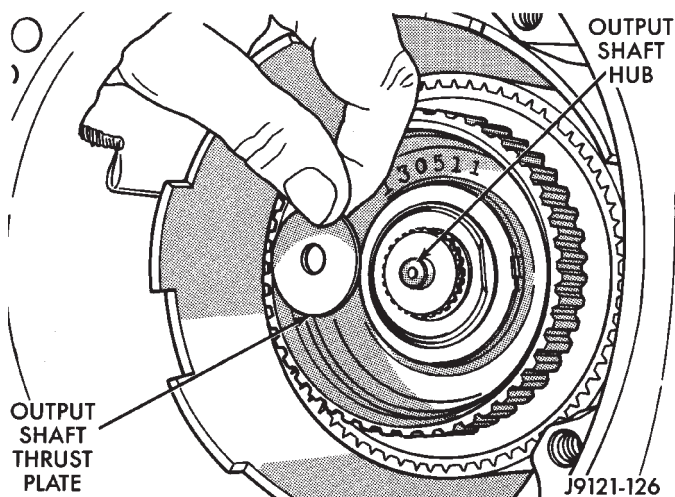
Removing/Installing Output Shaft Thrust Plate
